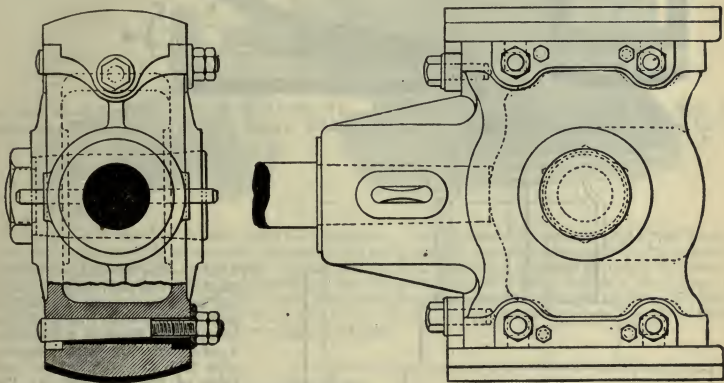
and 256.—Locomotive cross head with four guides. The end view at the left shows more clearly the location of the guides, and the form of the yoke which supports their outer ends.
